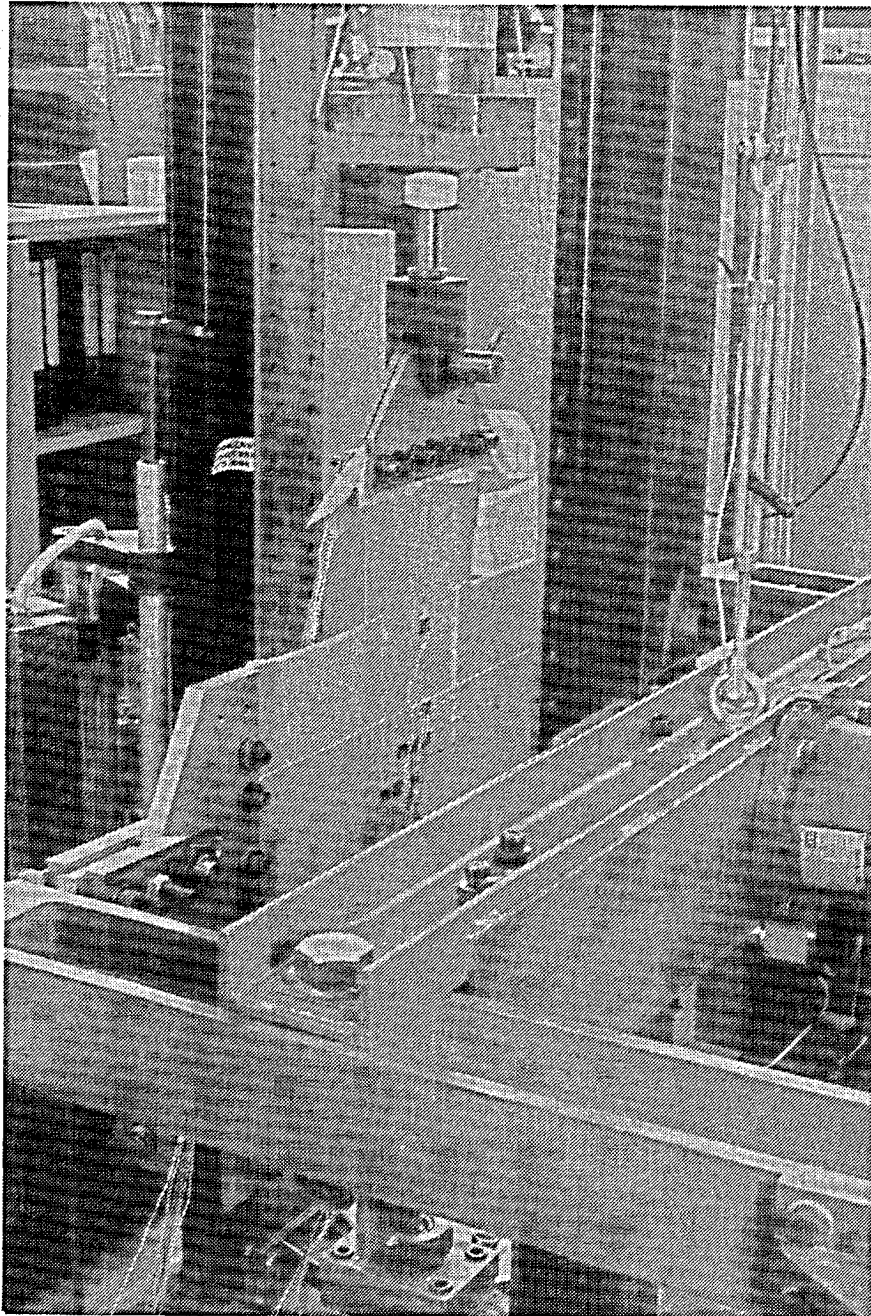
Set-up for biaxial testing of riveted lap joint coupons. Specimen width is 220 mm [ref. 3].
